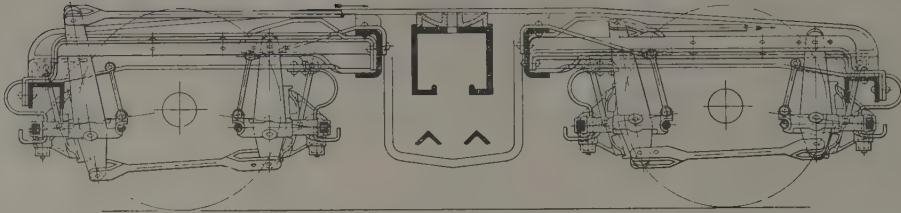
Diamond Special Brake Beam Clasp Brake Arrangement for Four-Wheel Trucks.
